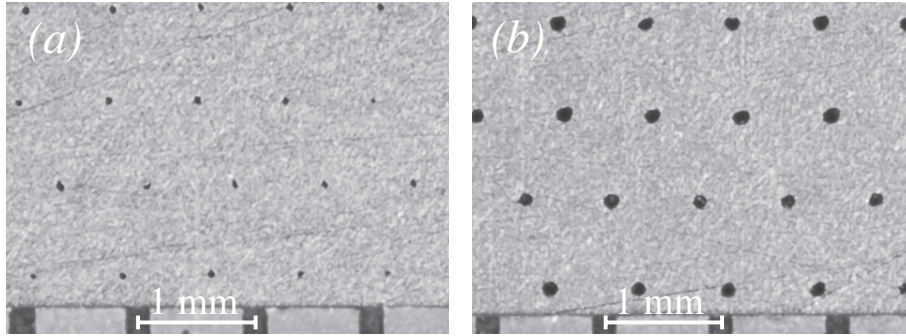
Images of the laser drilled titanium sheet. (a) the smaller hole diameter on the outlet side of the laser beam. (b) the larger hole diameter on the inlet side. At the bottom of the images a reference ruler is shown.
